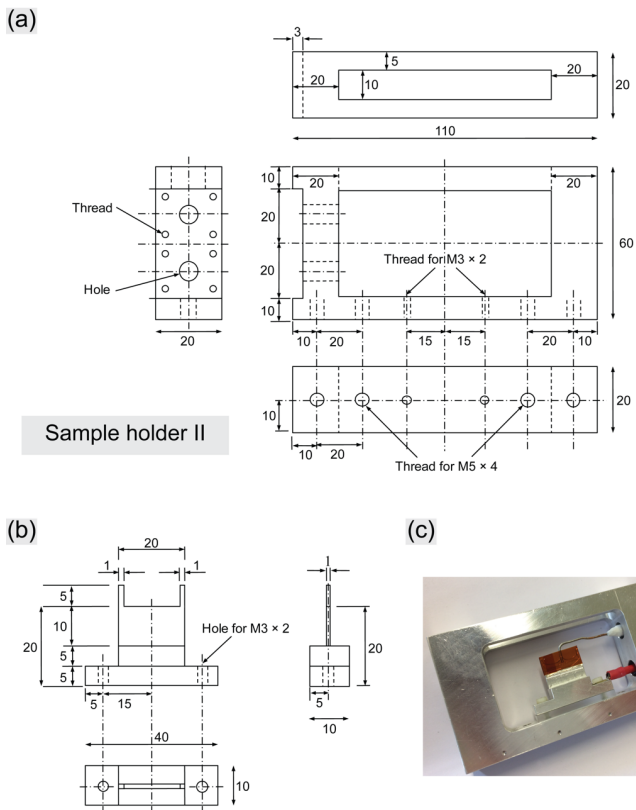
A sketch of the sample holder II for mounting polycrystalline samples. This holder has designed for the powder diffraction experiments. (a-b) Drawing the aluminum plates. The dimension is millimeter. (c) Photograph of the assembled sample holder II.
